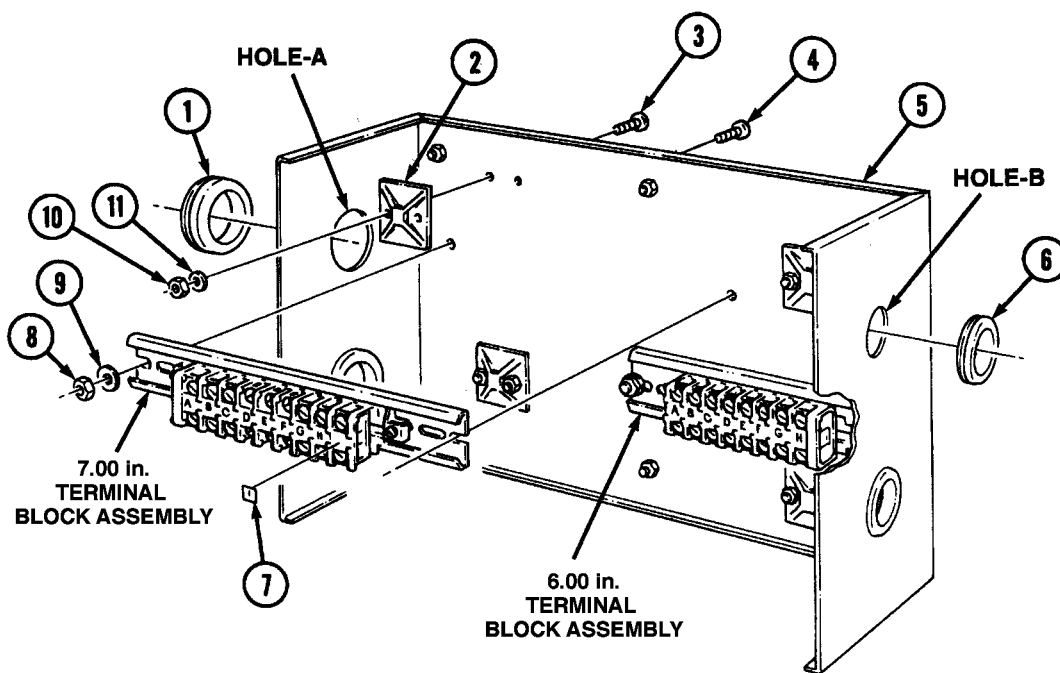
Terminal Block Assemblies and Cable Tie Holder Installation.
